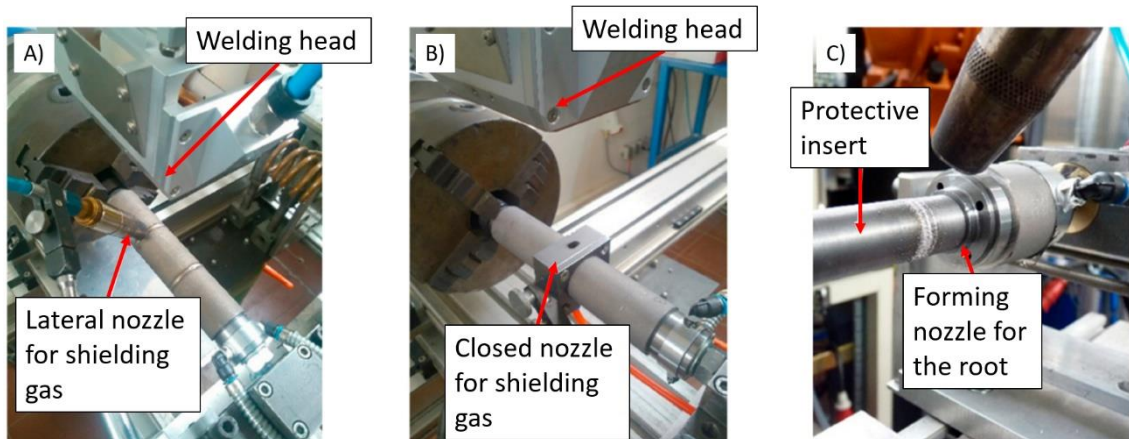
Laser welding setups. (Modified from Jokisch et al. 2020).
